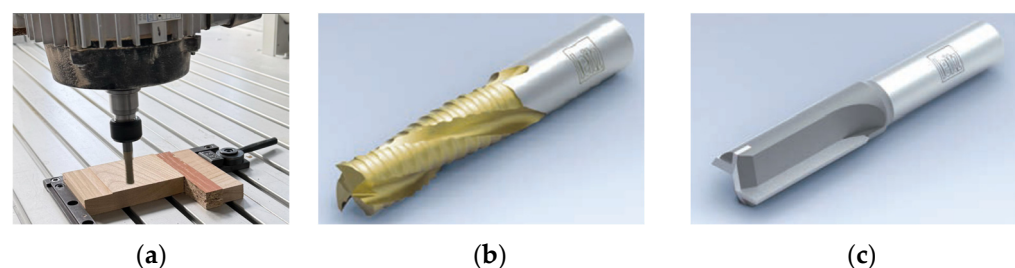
Machining on CNC: (a) workpiece mounted; (b) spiral-end mill T1; (c) straight-end mill T2.
